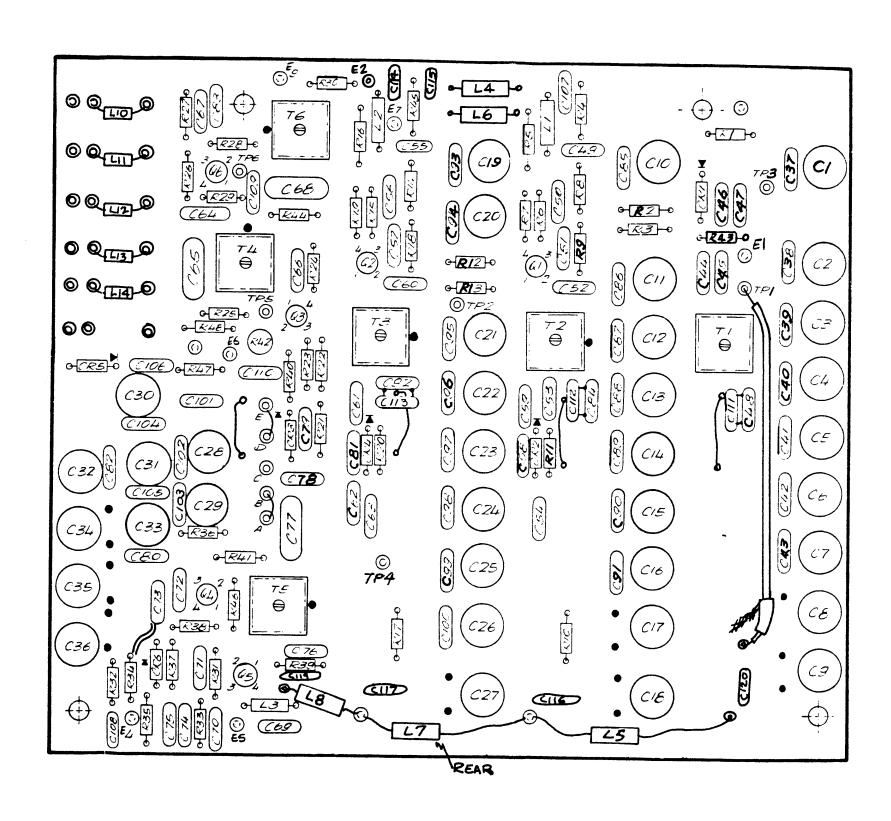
Tunable IF Assembly Z301, Location of Components
